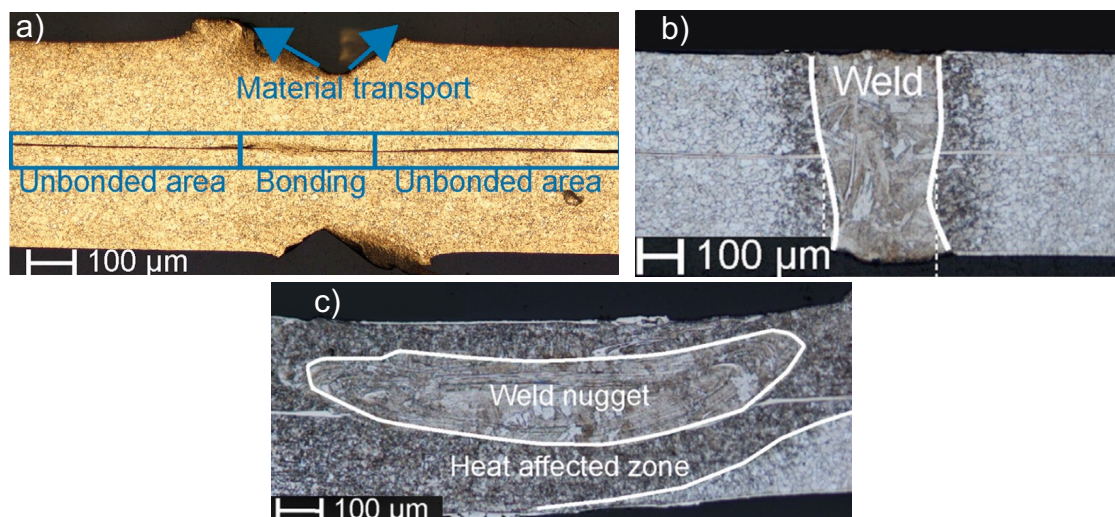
Representative micrographs of welds produced by (a) ultrasonic welding, (b) laser welding, and (c) resistance spot welding setup [18].
